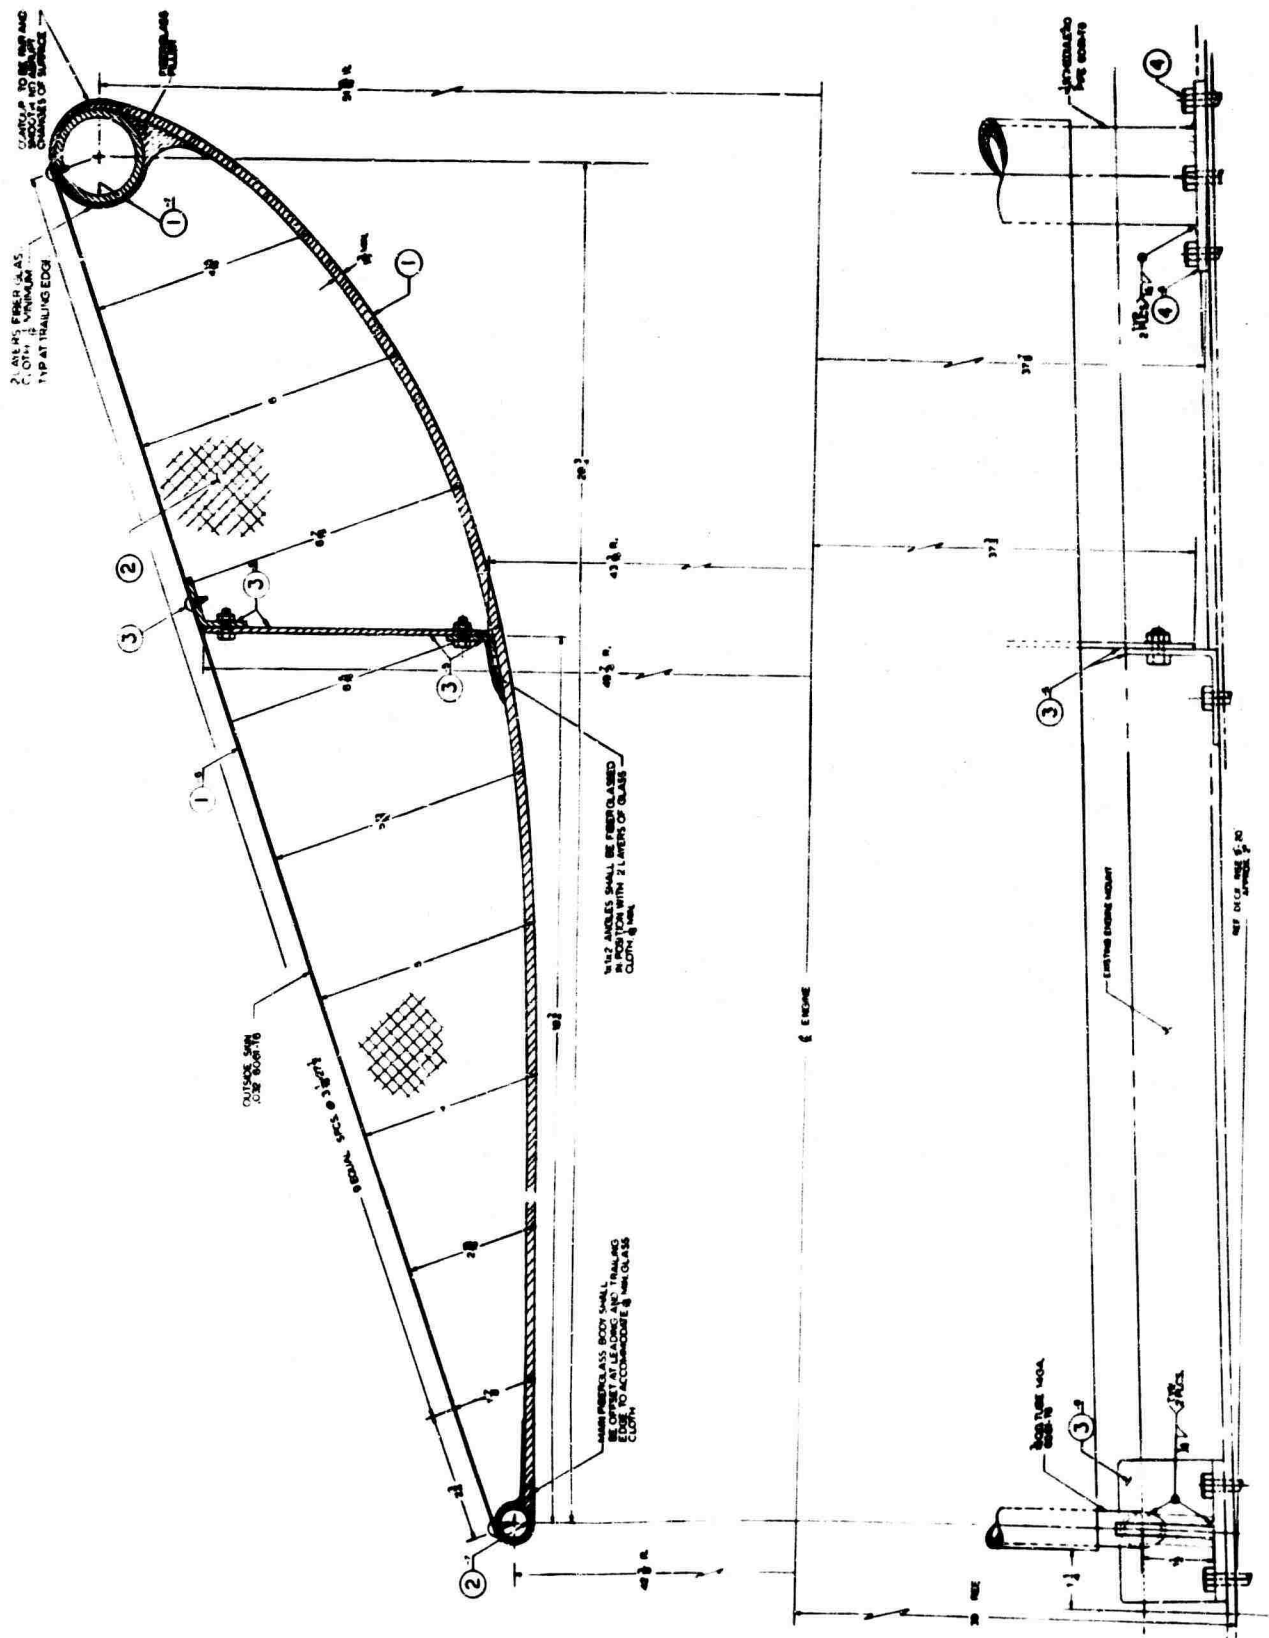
SHROUD STRUCTURAL ARRANGEMENTS
